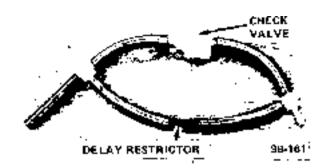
B-186 Delay Restrictor and Check Valve Hose Assembly
